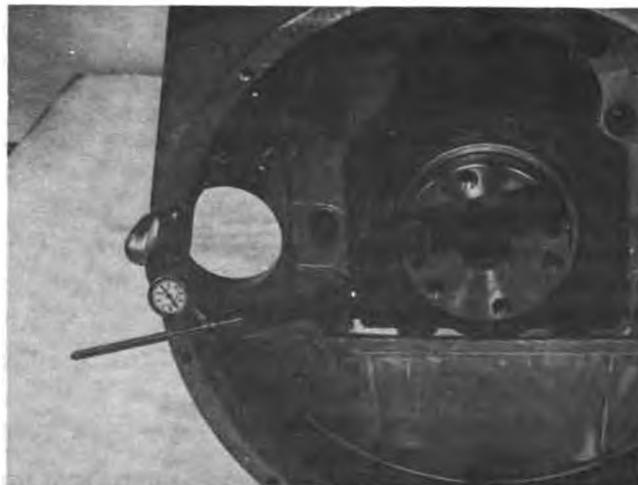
(N114276). Check The Alignment Of The Housing Face.
